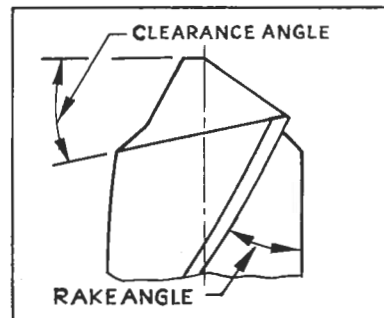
Drill Point showing Rake and Clearance Angles directly behind the cutting edge, as per Fig. 91. The lip clearance angle for normal work should be between 9° and 12°, and clearance on each lip must be equal.
